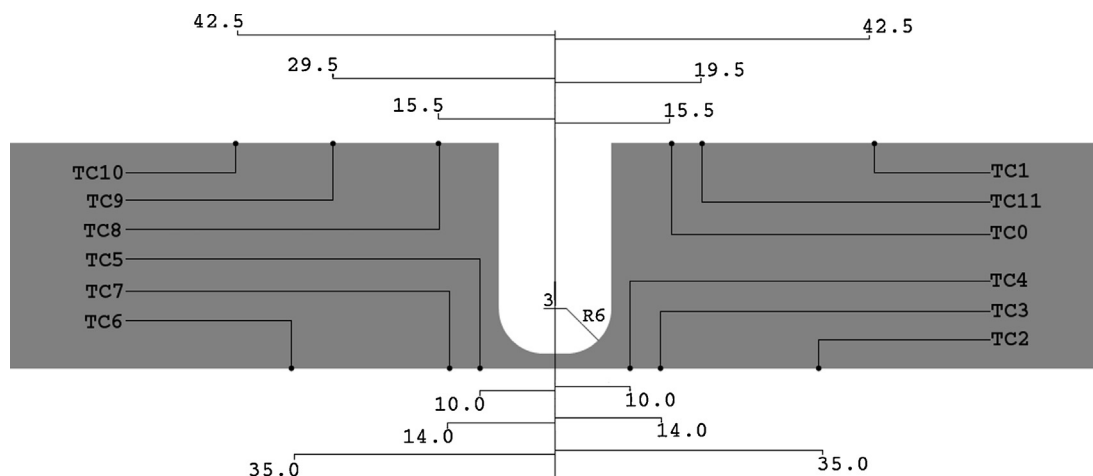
Schematic diagram showing the cross section of the specimen at $z = 205$ mm. The groove geometry and thermocouple locations are visible. All dimensions are in mm.
